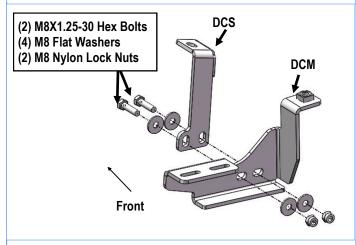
Locking Plate (DCS1) Installation (Driver Center Side )
